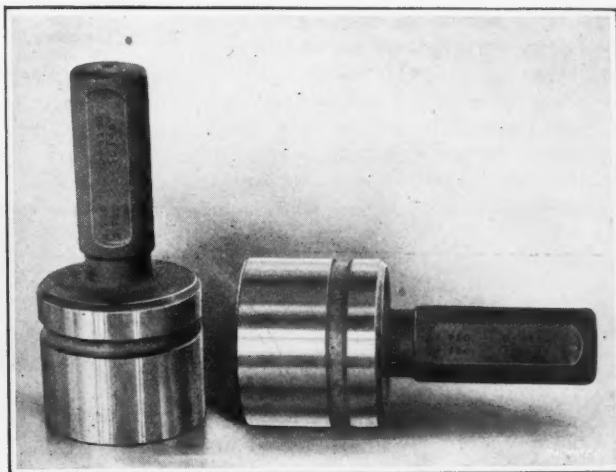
Two-step Plug Gages used for the Inspection of Through Holes
